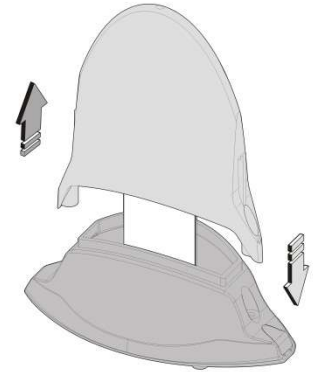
Removal and Attachment of the SFL Top Cover
